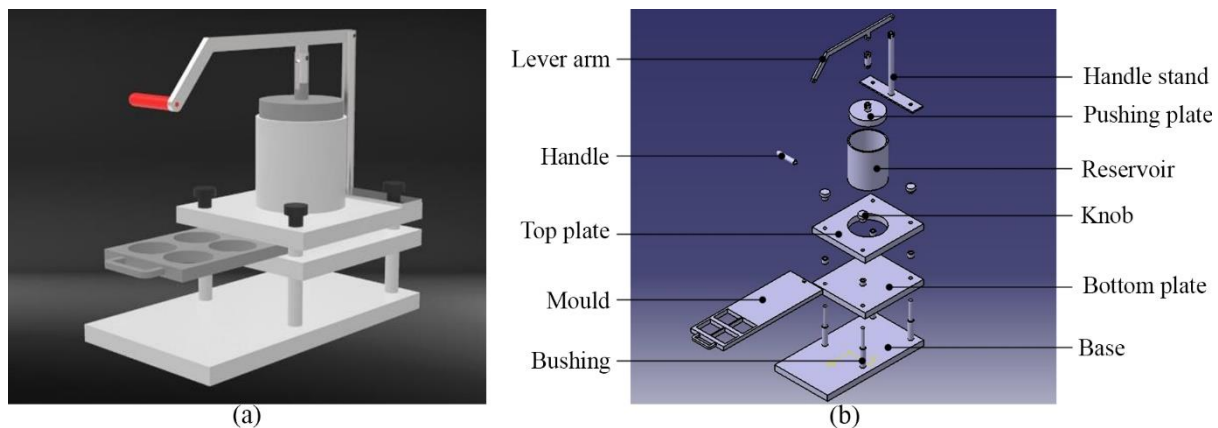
(a) 3-D isometric view and (b) Exploded view of the shrimp paste mould.
